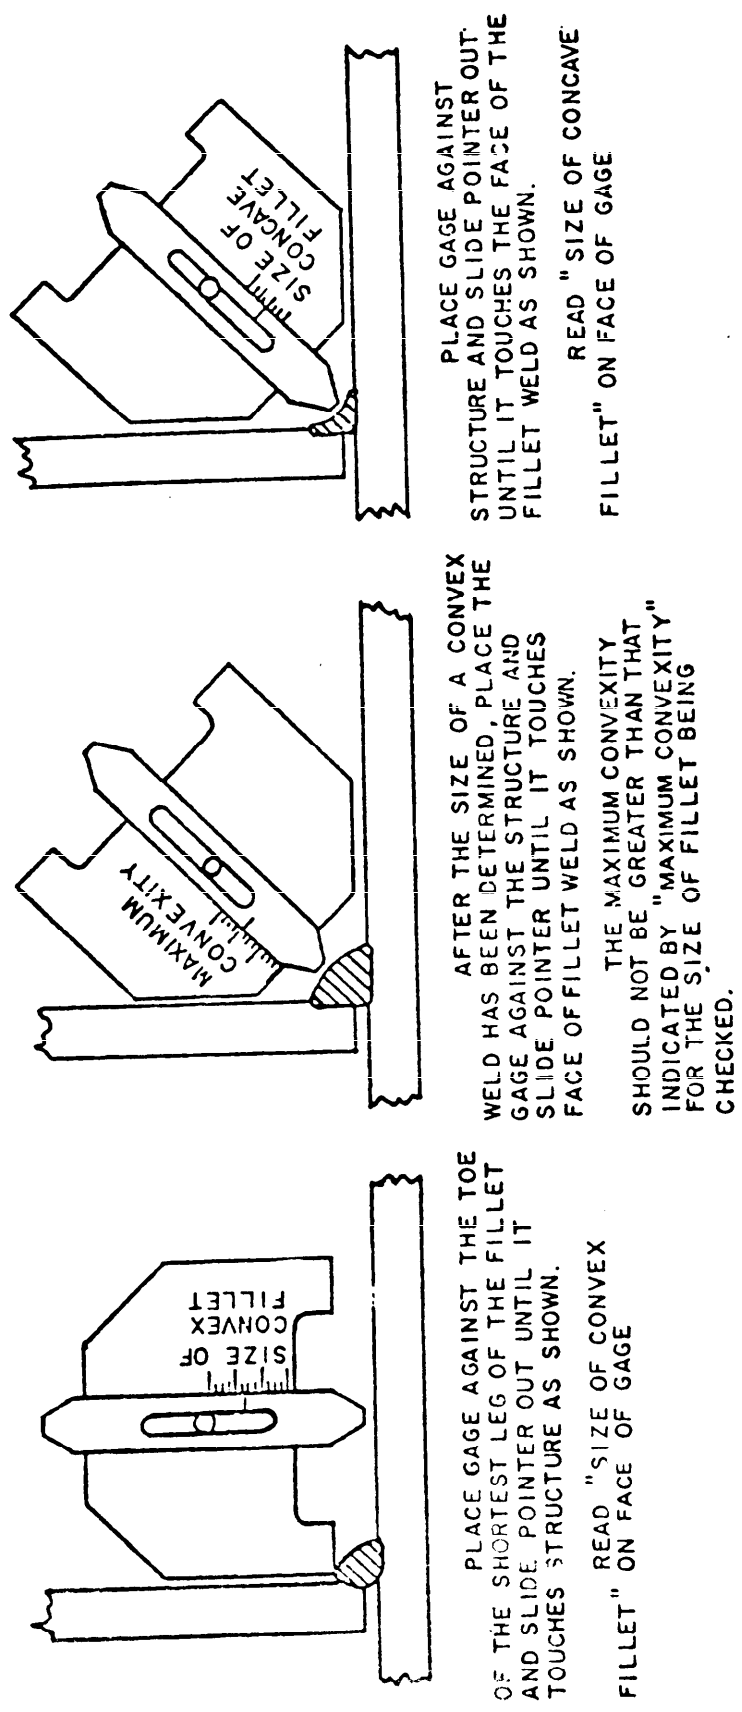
METHOD OF USING BUTT AND FILLET WELD GAGE
